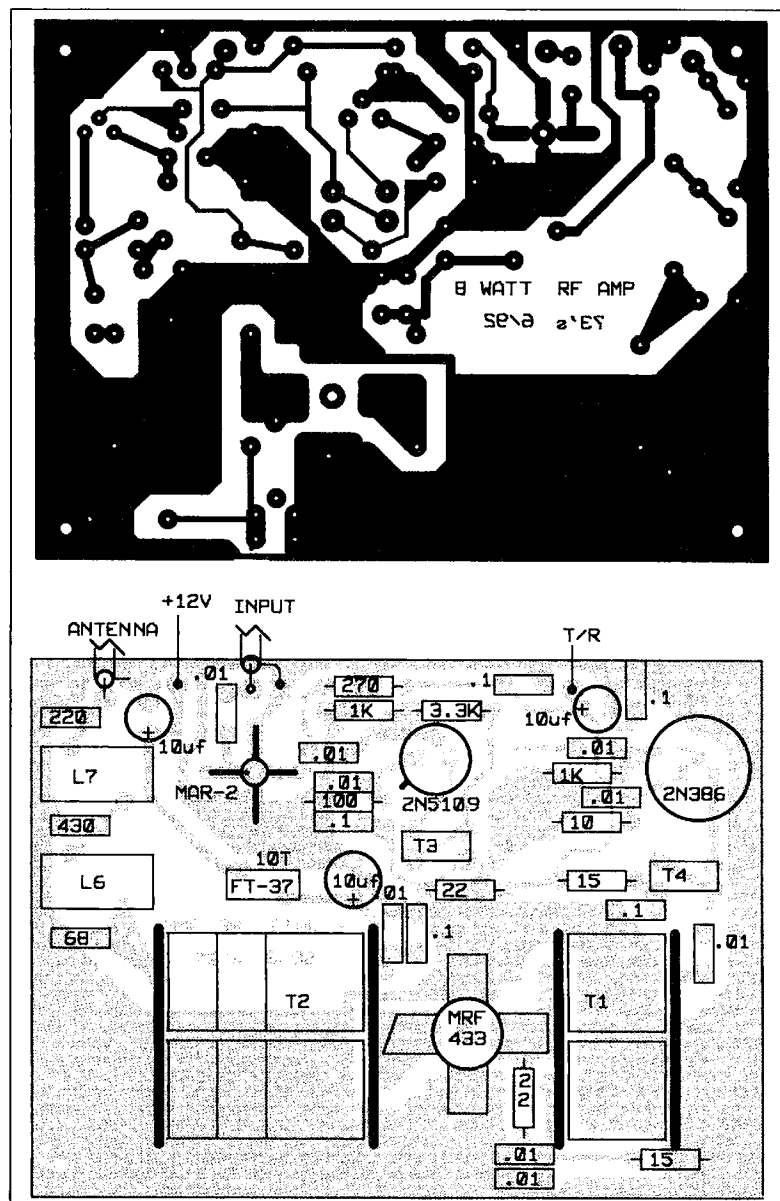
a. PC board foil pattern for the power amplifier board. b. Parts placement.
